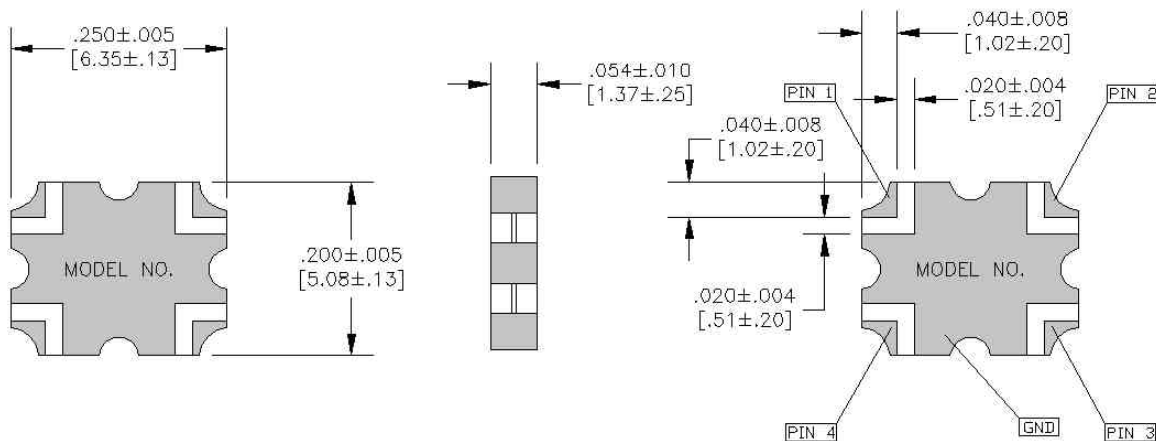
Outline Drawing for the 1P503 pico-Xinger
